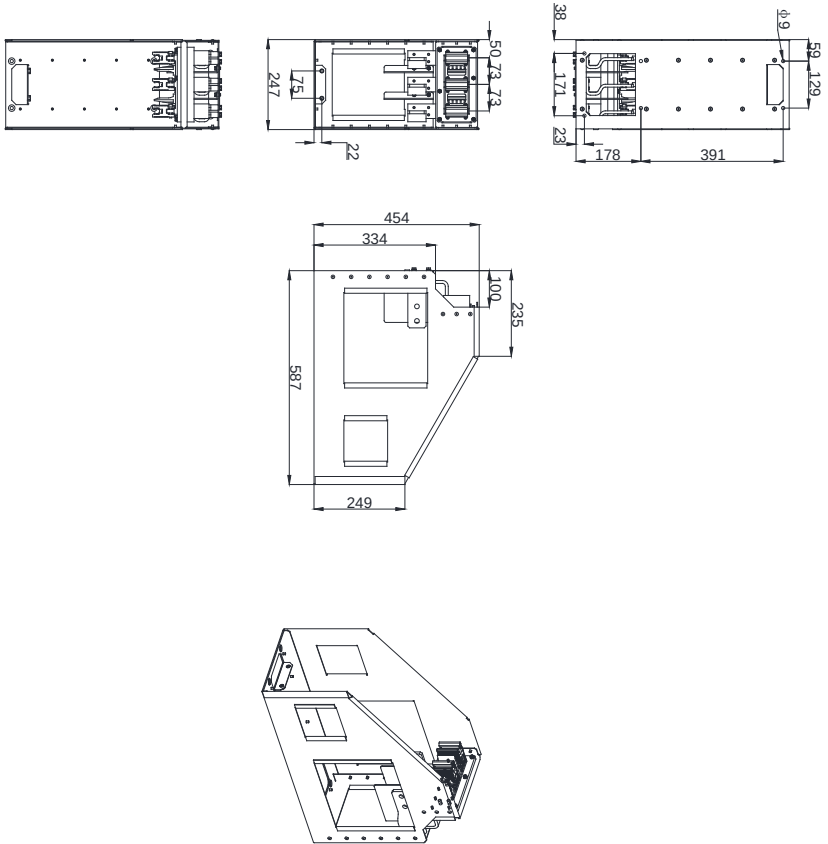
8-10 Dimensions of H8-quick-kit Quick Plug Installation Kit
